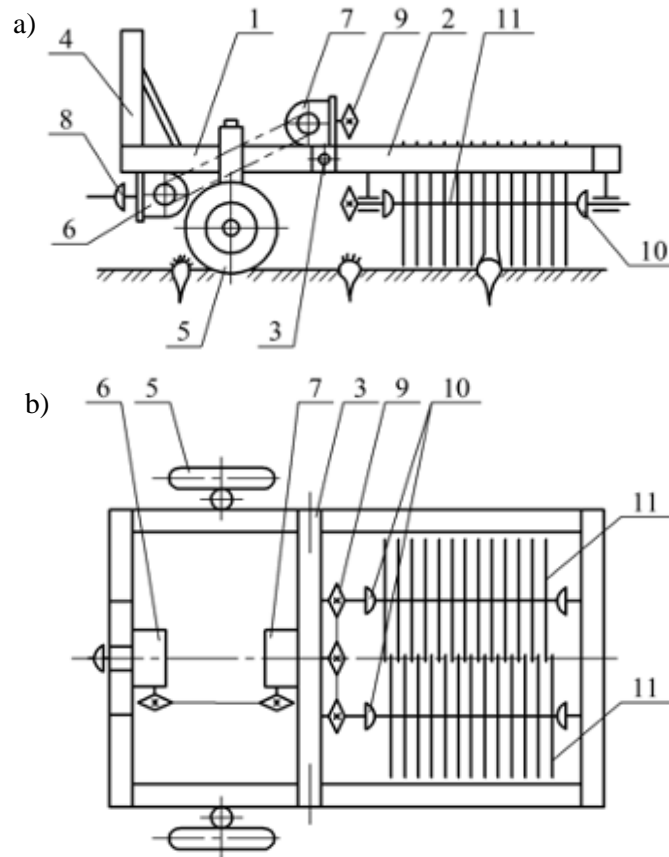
Structural scheme of the experimental equipment: a – side projection; b – top view
